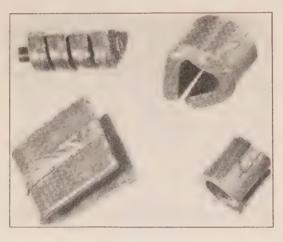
Samples of Steel Welded and Deformed without Failure of Weld
